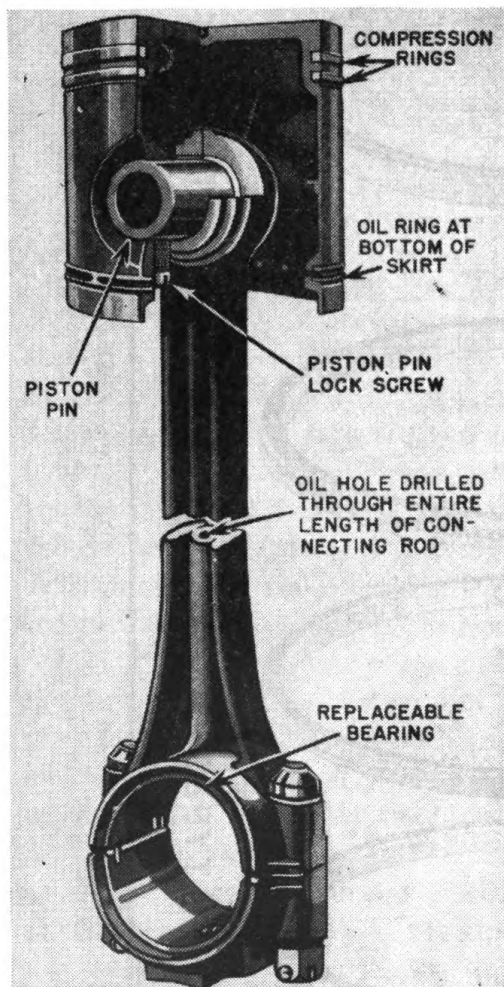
Piston and connecting-rod assembly, showing oil hole through rod.
